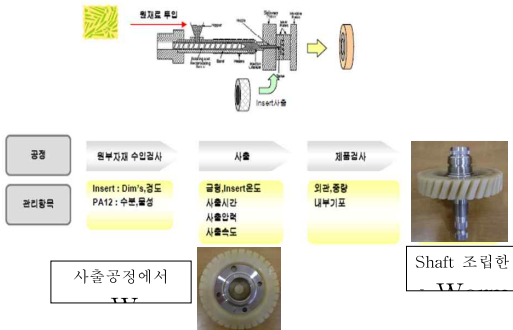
One-body manufacturing process of worm wheel (without Hobbing process)
